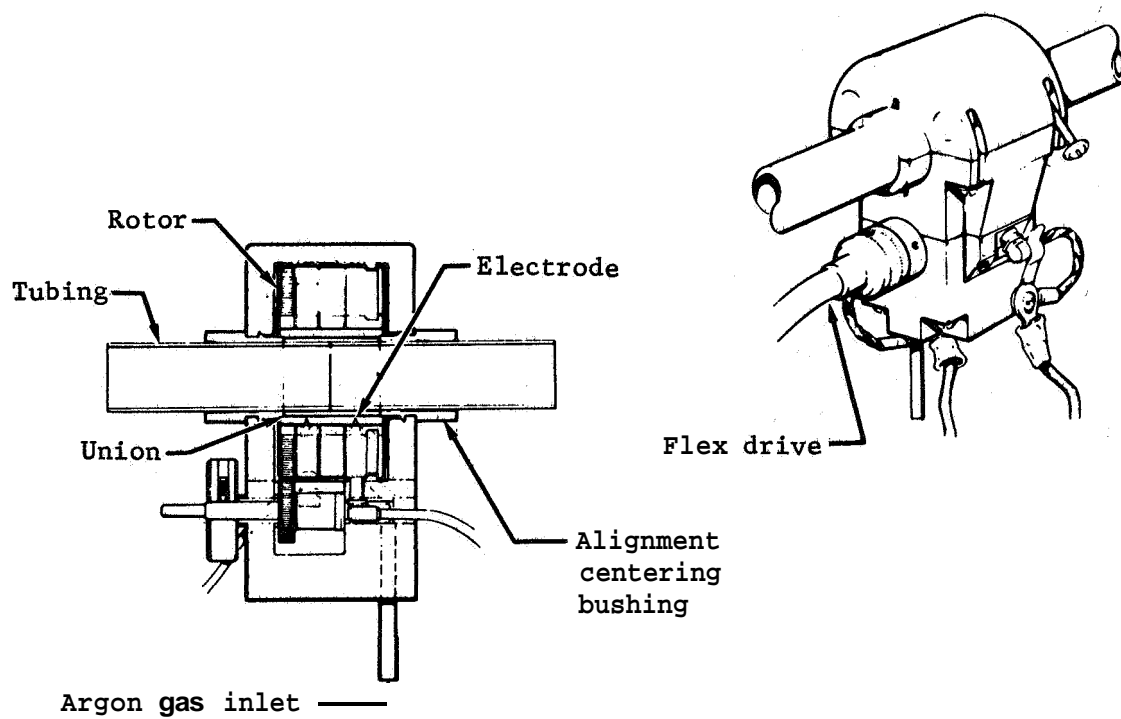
DIAGRAM OF EXTERNAL WELDING TOOL FOR GTA WELDING STAINLESS STEEL TUBING (REF.34)
